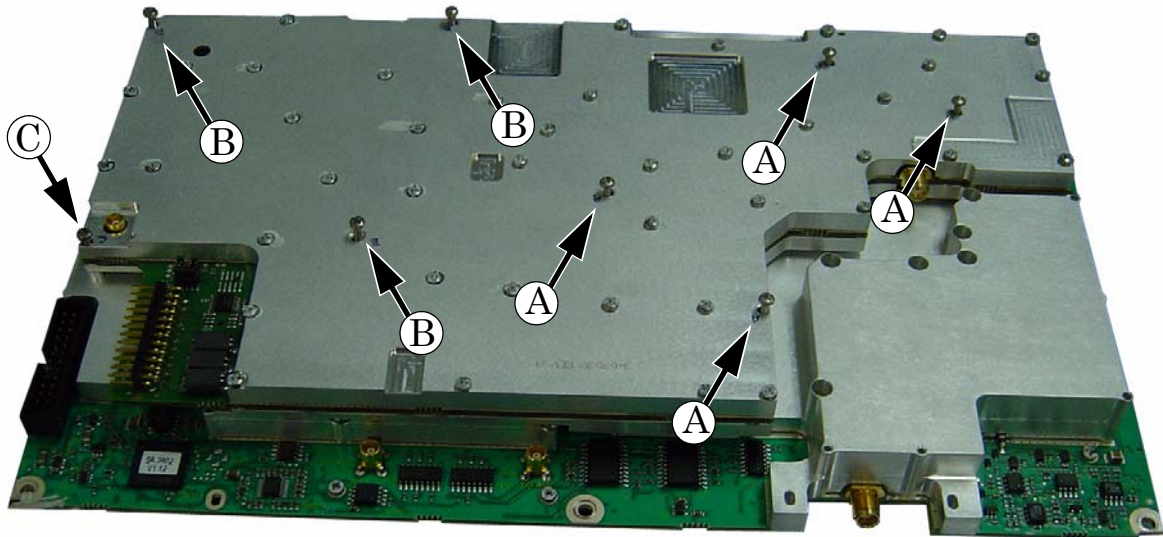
Tracking Generator PCB Mounted to SPA PCB
